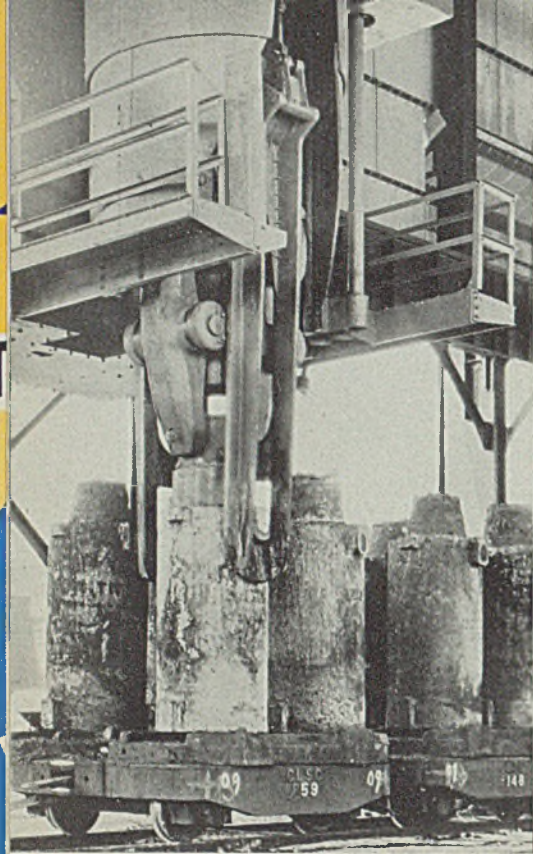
Ingot stripper showing links engaged with mold trunnions and an ingot in the jaws of the bullnose
